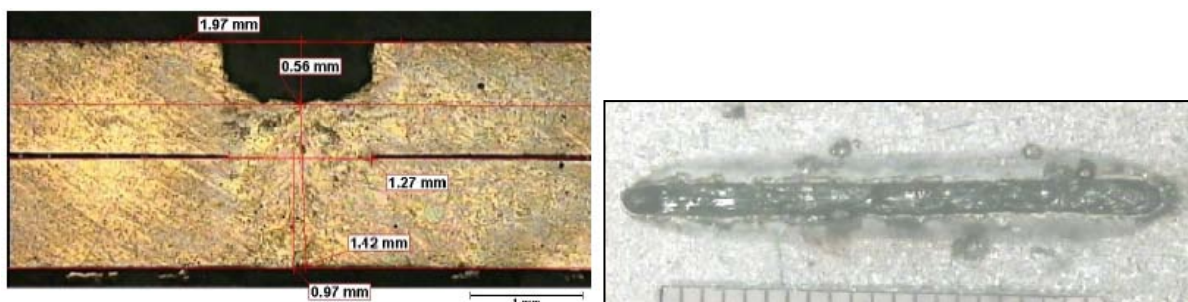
Microsection and top bead: Overlap weld: 1.0mm to 1.0mm, DX54, 0mm gap, showing undercut and surface spatter
